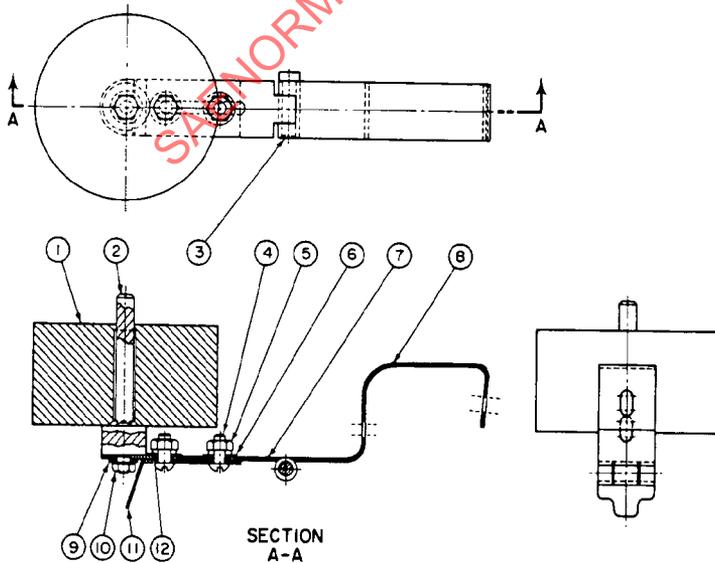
ASSEMBLY OF SCUFFING TEST FIXTURE
